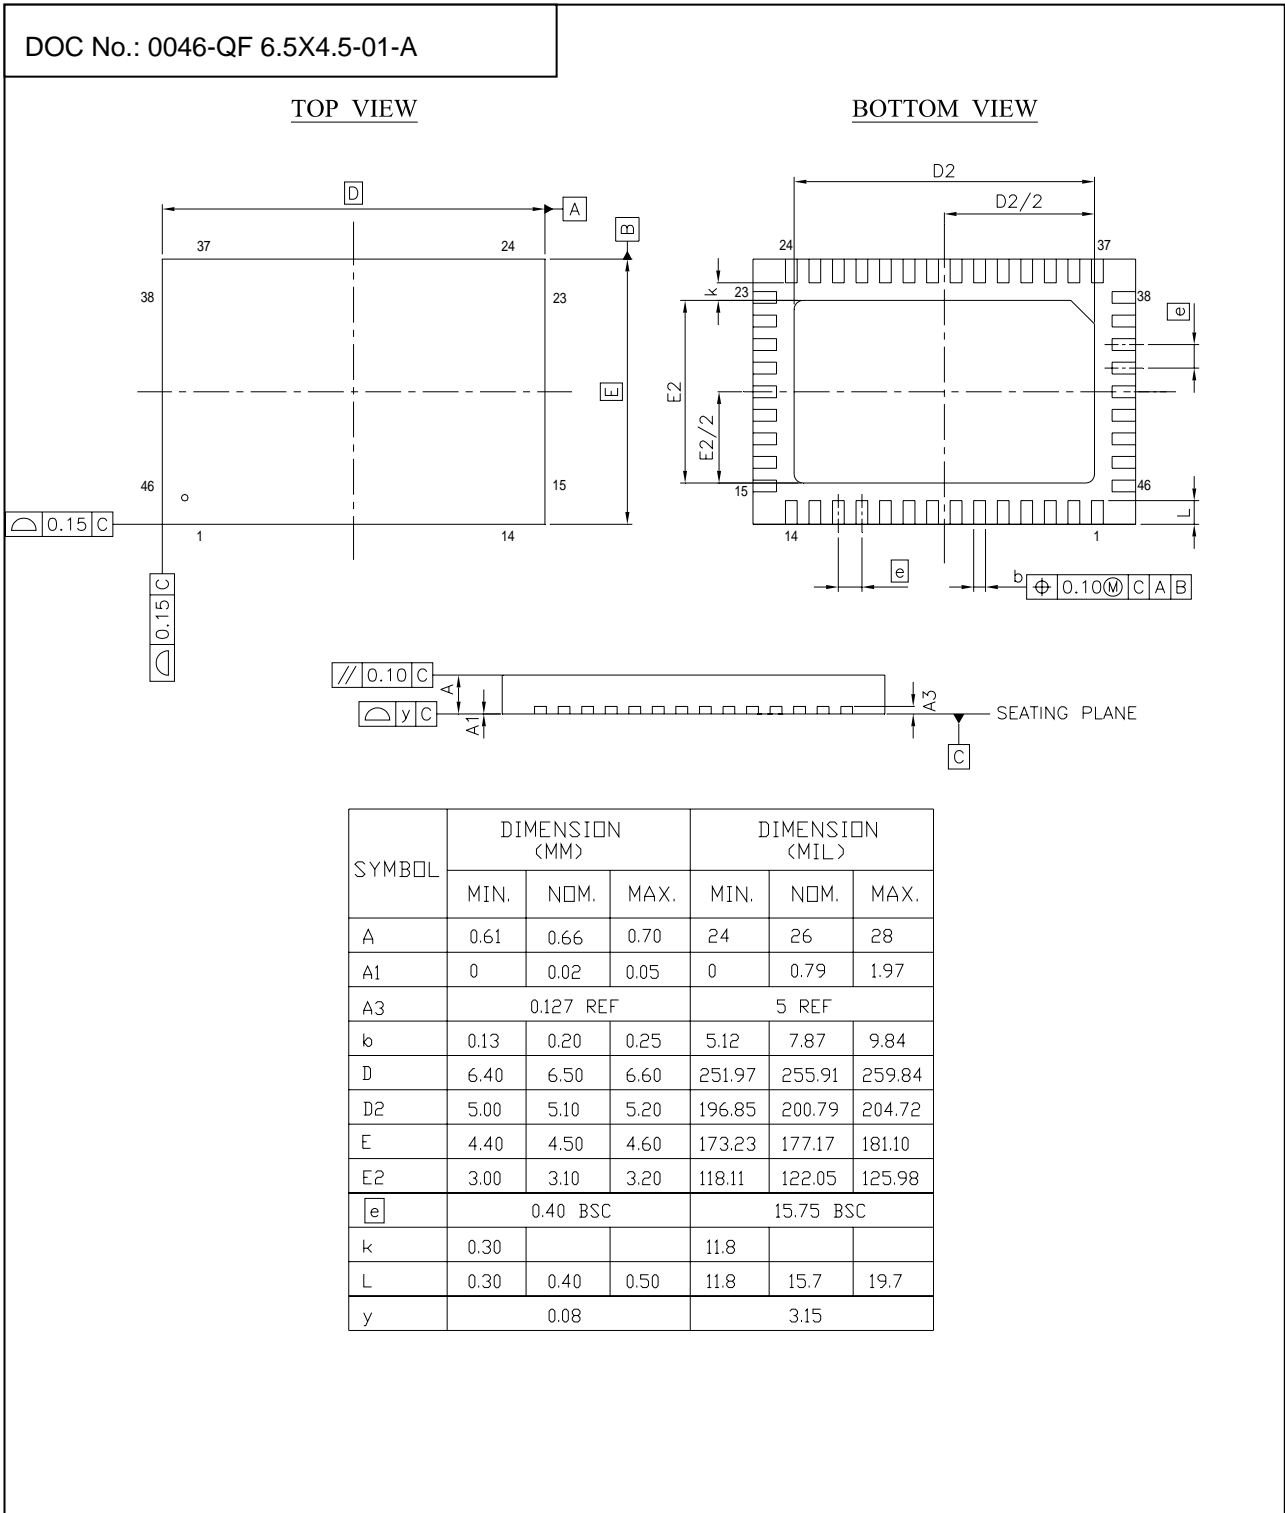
46 Pin QFN 6.5 x 4.5 x 0.7 mm Package Outline Dimension
